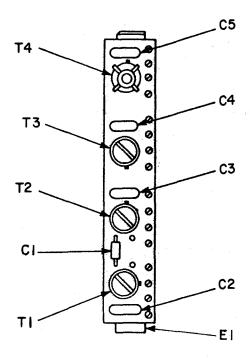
4 MHz Subassembly A2A4A22, Component Locations
